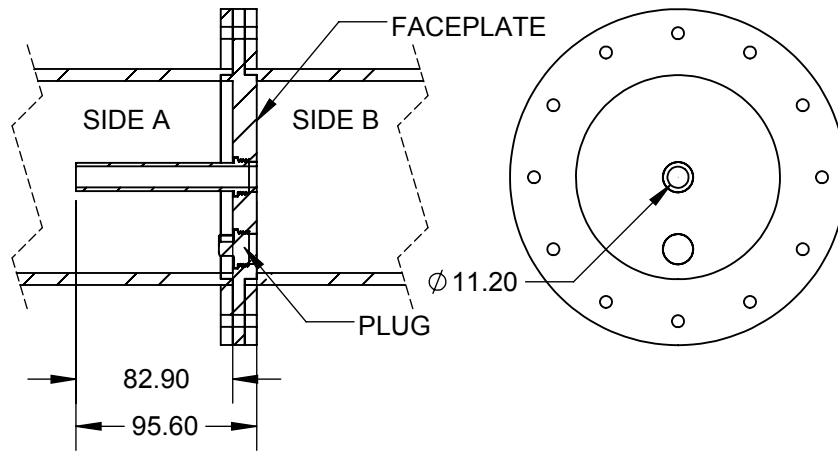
Front and sectional views of the mounting plate for the injectors with unique geometric features installed in the two-sided impedance tube, with dimensions (in mm).
